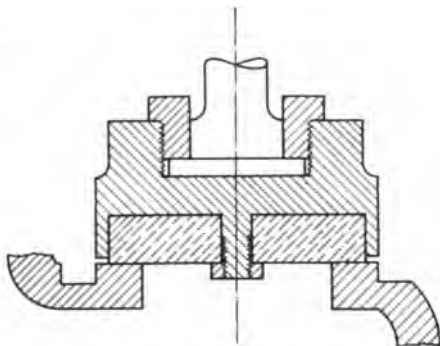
Enlarged Section Through Valve Disc and Seat for $\frac{1}{2}$ and $\frac{3}{4}$ -inch Crane Globe Valves Tested.
